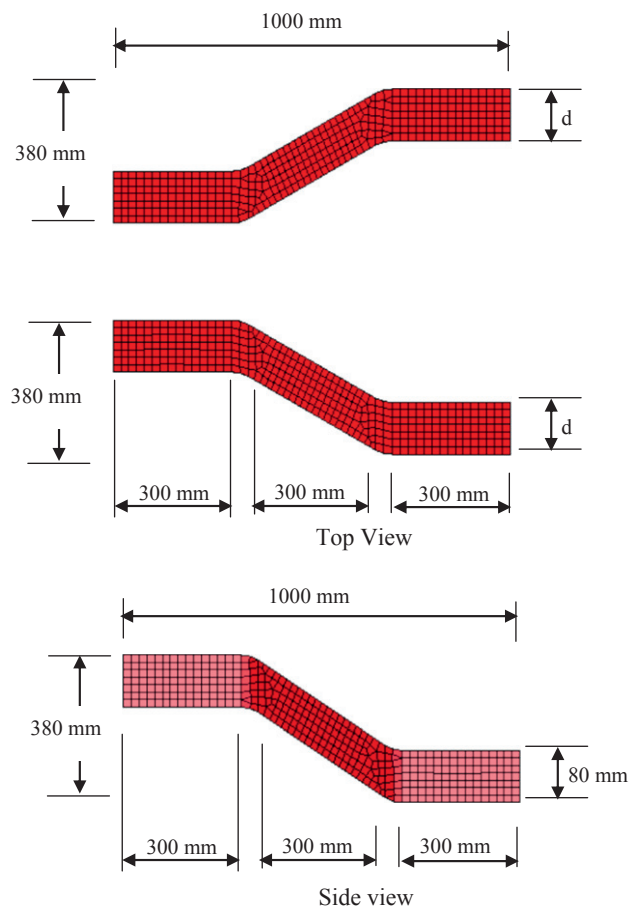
Configuration of an S-shaped longitudinal member in top and side views.
